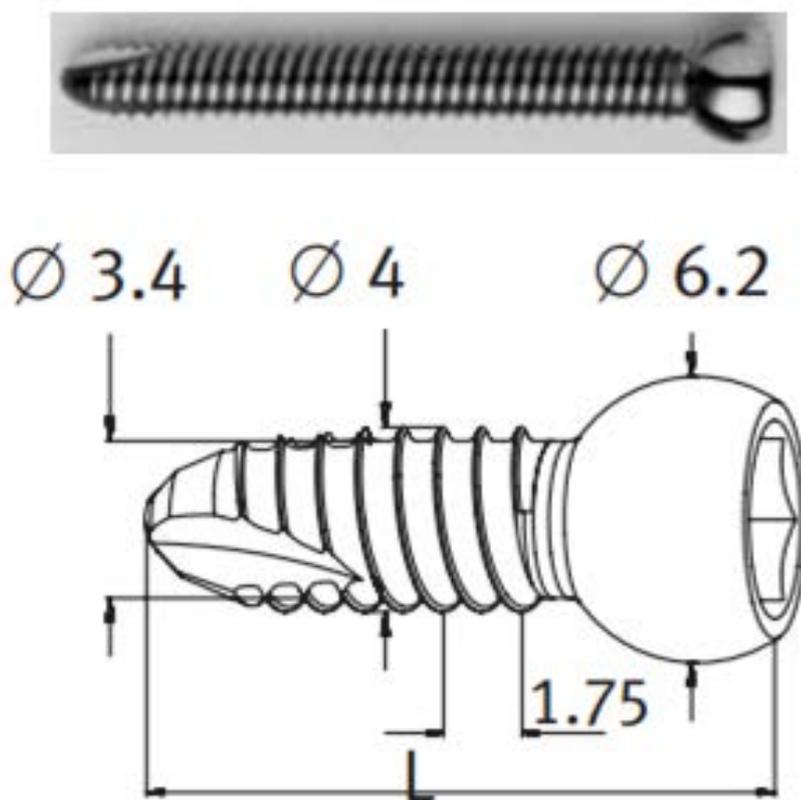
The dimensions of the Ø4.0 mm NCB locking screw for proximal humerus fracture fixation which was used as a control (Zimmer GmbH, 2015)
